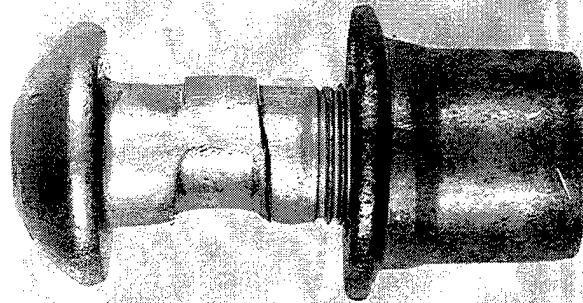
Double-sheared Huckbolt fastener from shear test Specimen A after the shear test. The collar was fully swaged. Actual size.
